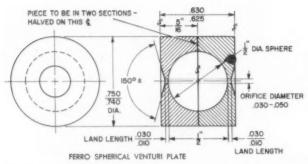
Ferro spherical venturi plate is of simple design and manufacture. Critical dimensions are the $\frac{1}{2}$ -in. diameter of the spherical mixing chamber located in the center of the plate, the land length, and diameter of the inlet and outlet orifices.
